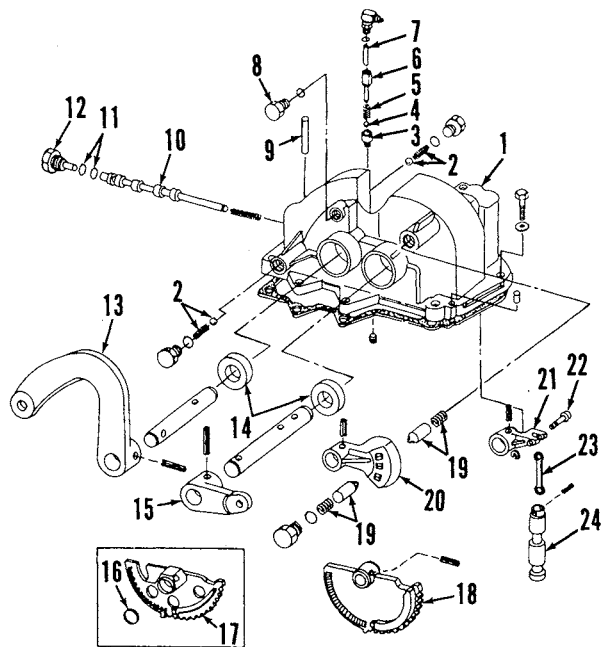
Exploded view of transmission control valve housing cover and control linkage. Sector (17) and shim (16) are used on early models, and sector (18) is used on late models.
